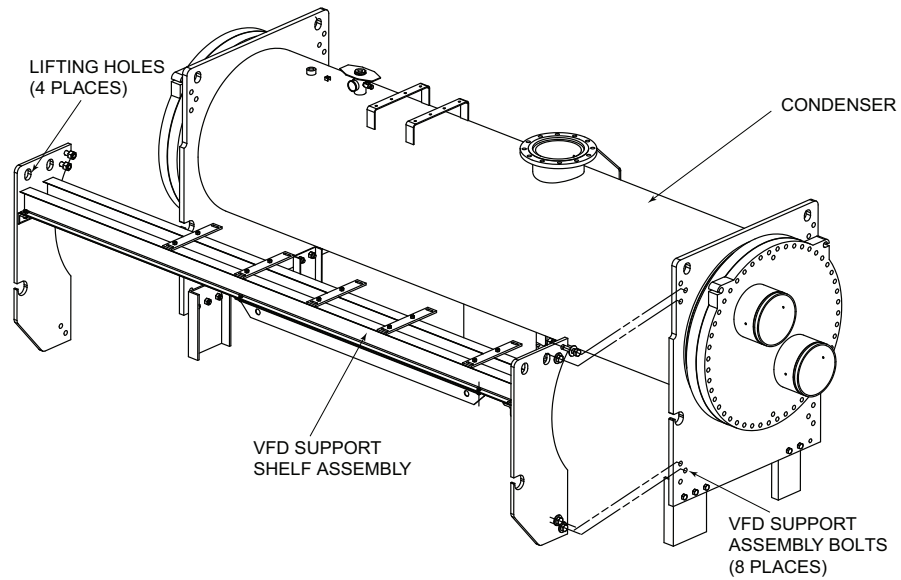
900A or 1200A VFD Support Assembly Installation
